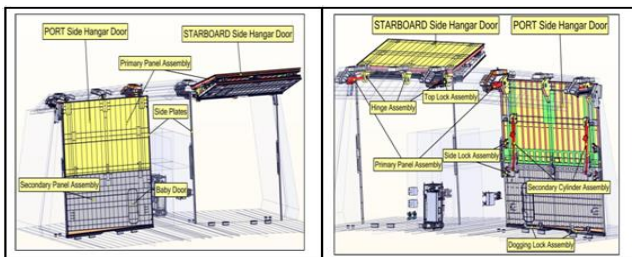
Foldable Hangar Door System (3D model) – Front view & Back View
